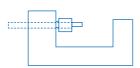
and hollow-center clamping (when using a cylinder with through hole) for processing bar material
